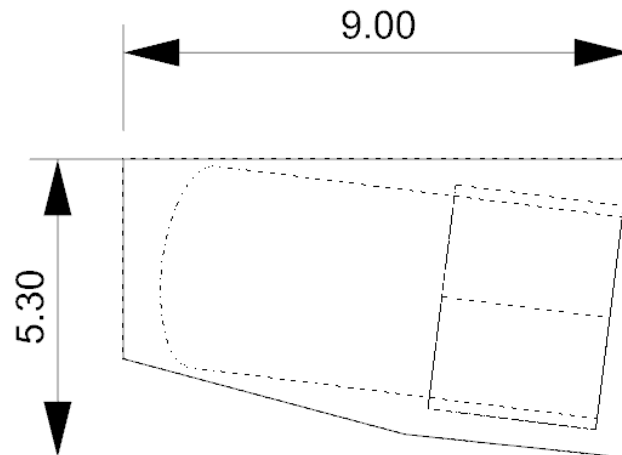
Side view of MAN cryo tank inside recoil tanks.
